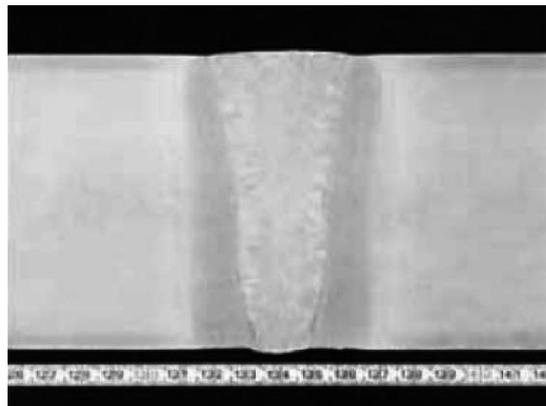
Macro photo of electrogas welding with a heat input of 680 kJ/cm and a plate thickness of 80mm^[4]
